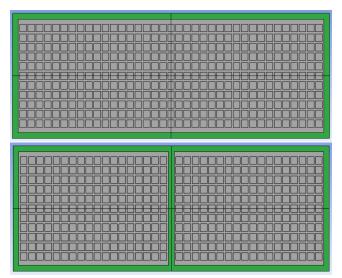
Single block CA95 strip (top) and a 2 block CA95 strip (bottom) layout.
